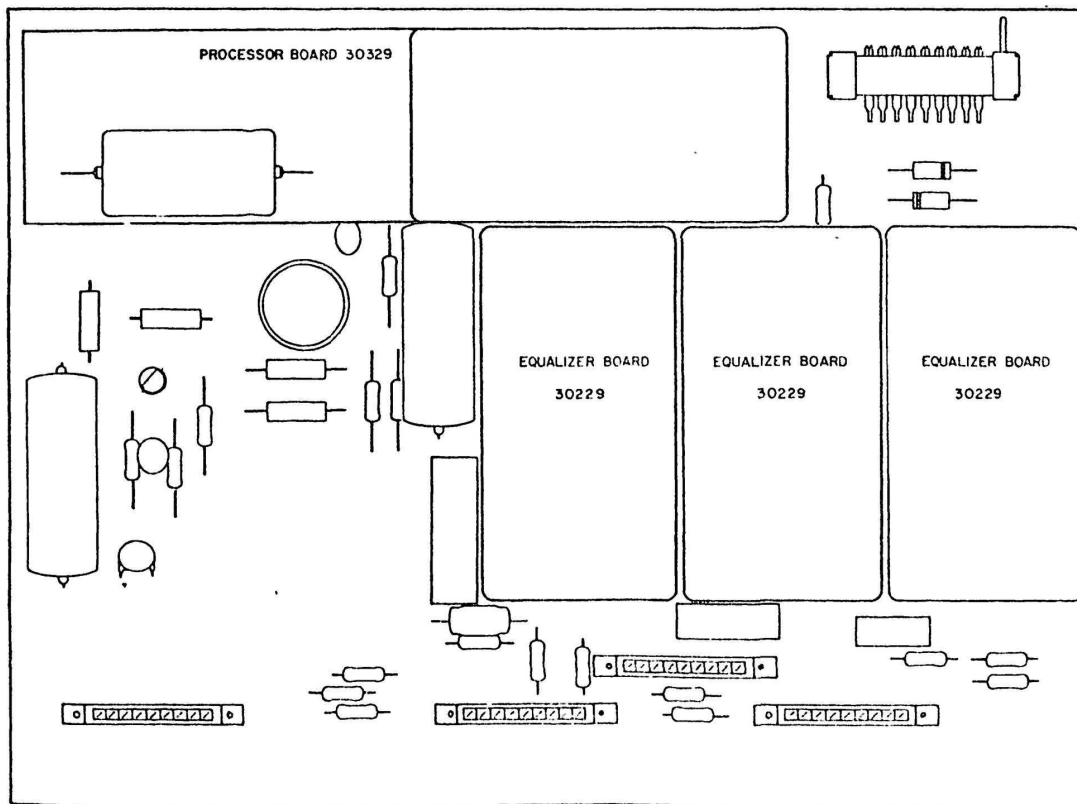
MASTER BOARD SUBASSEMBLY LOCATIONS
